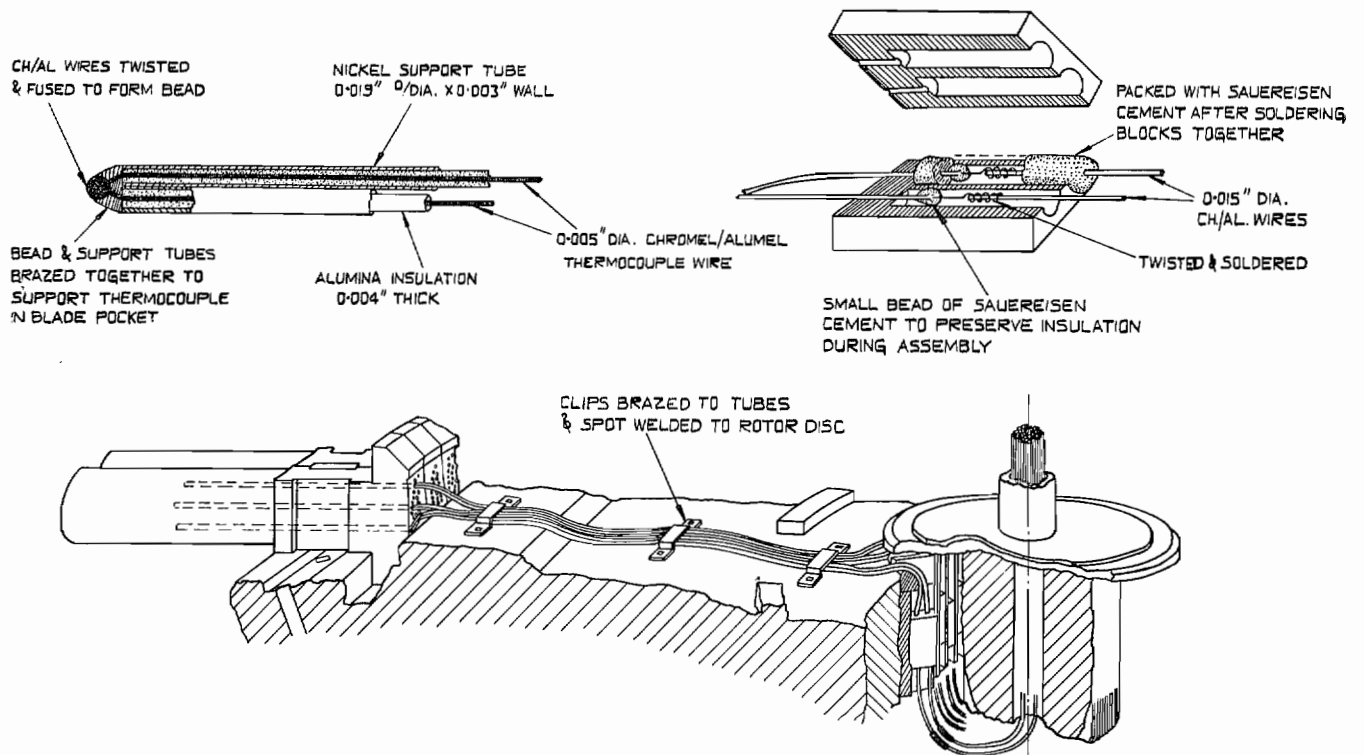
Diagrammatic sketch of rotor blade thermocouples.
